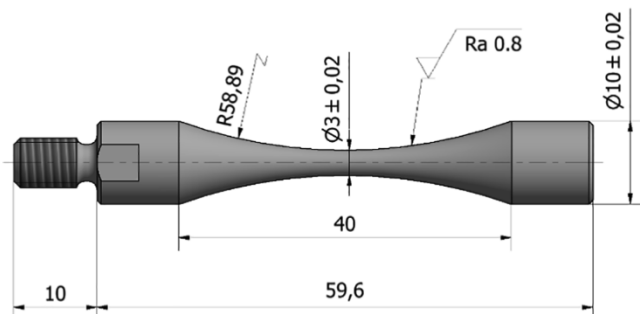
Dimensions (in mm) of the specimens used for ultrasonic fatigue tests.
